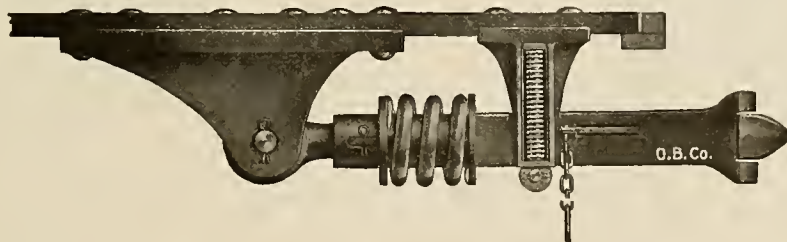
TYPE A, FORM 4, NO. 3 COUPLER WITH DROP DRAFT GEAR AND SPRING HANGER. MADE ALSO IN THE NO. 2. SIZE.
